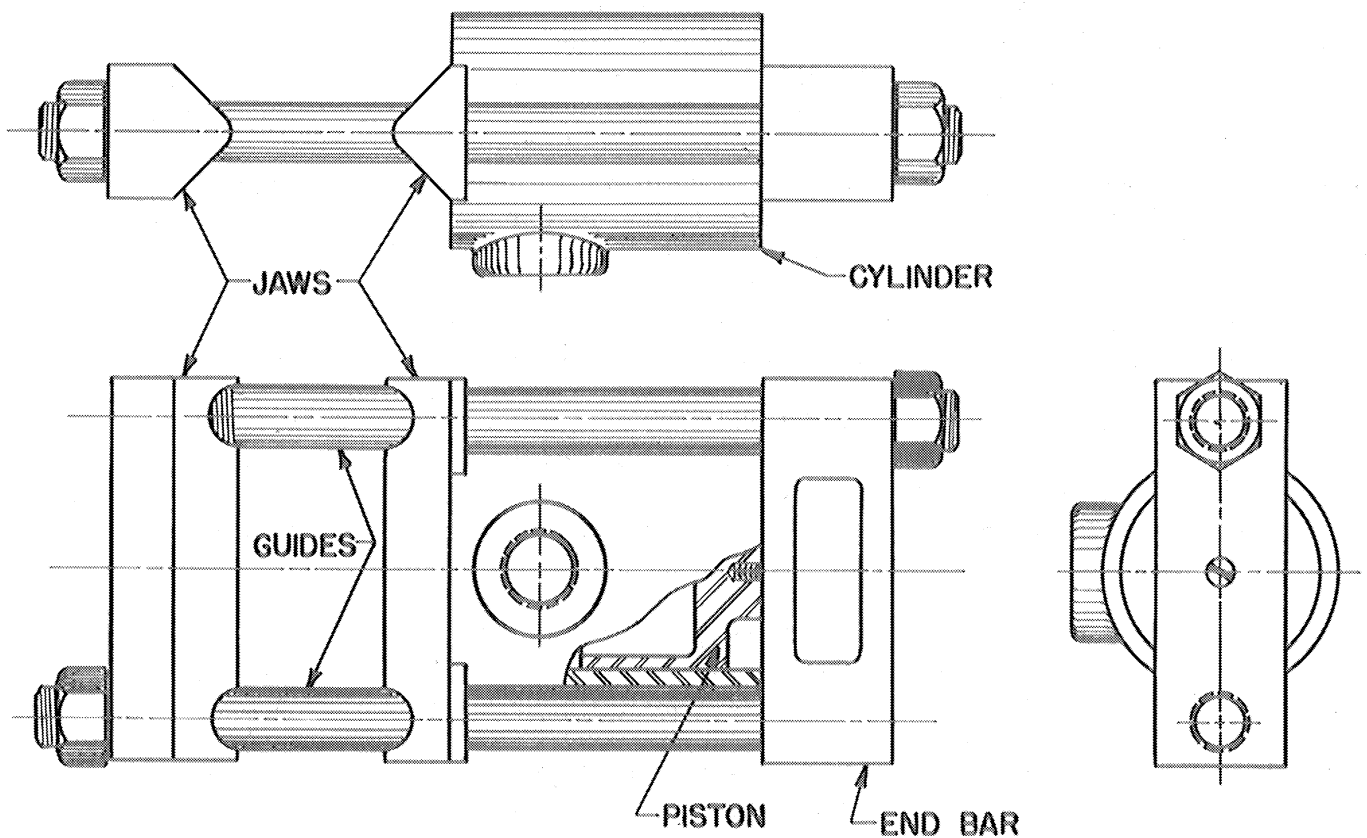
Schematic of Cold-Weld Sealer
